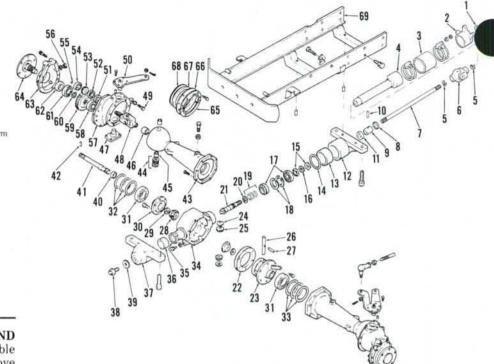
Exploded view of front wheel drive axle used on 1100 and 1200 models.
